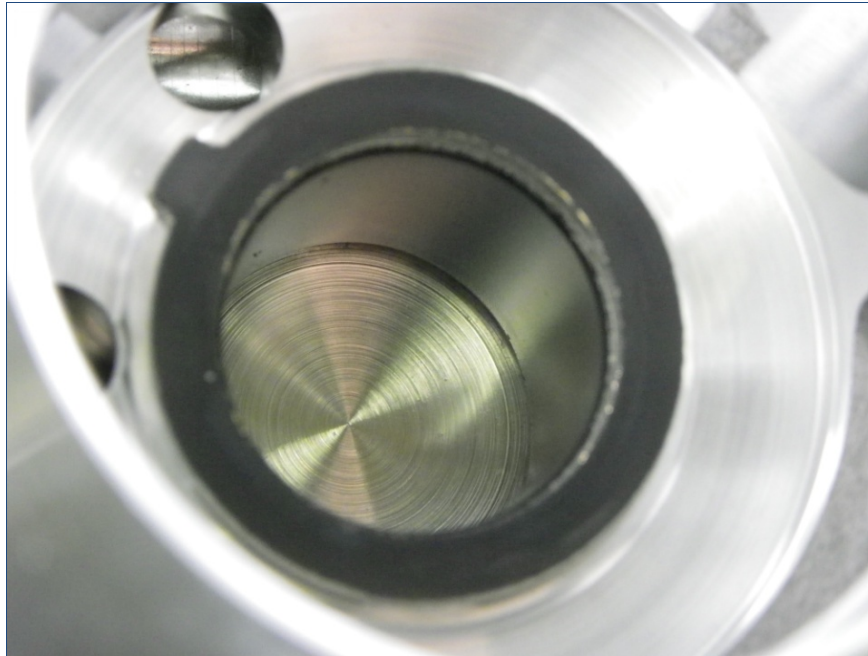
AF7938 50/50 JP-8/HRJ, Rear Pump Body Camshaft Bushing
